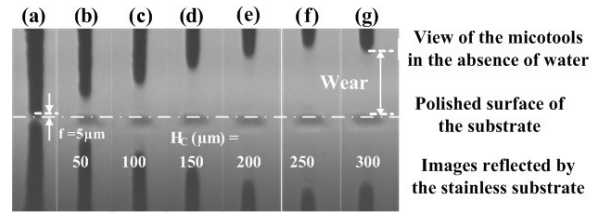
(a) Microtool at initial gap; (b) to (g) Microtool wear after machining.
